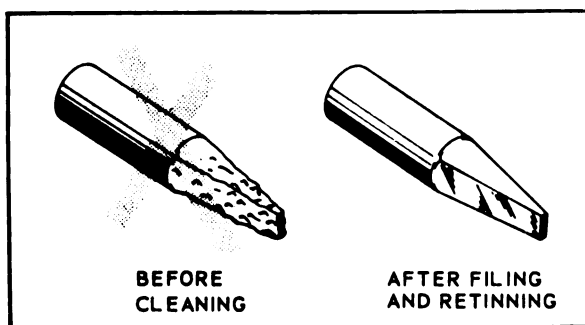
Soldering Iron Tip Before and After Cleaning
